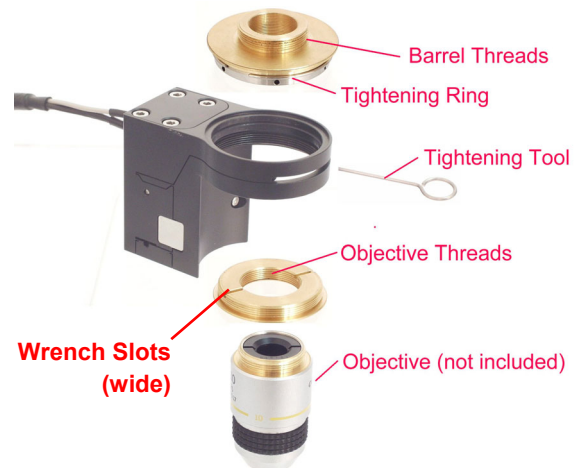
PIFOC[®] with quick lock insert and microscope objective.
